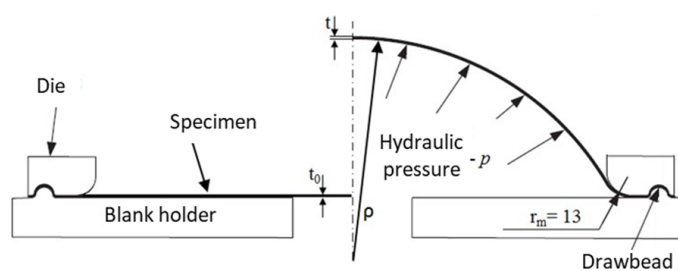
Representative scheme of the hydraulic bulge test and its key variables (dimensions in mm) - adapted from [87].
